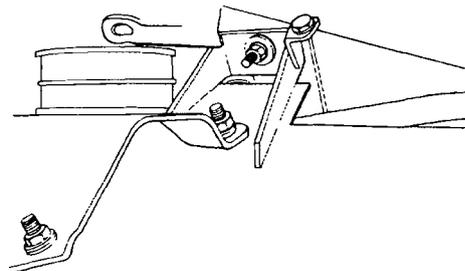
Removing the Fuel Tank Filler and Breather Hose
